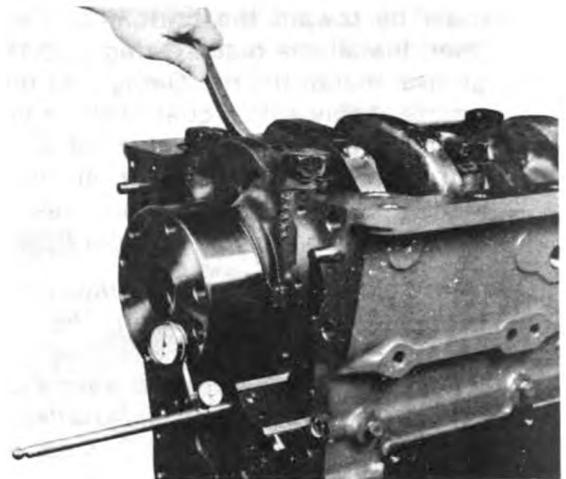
(N114245). Measure The End Clearance Of The Crankshaft.
